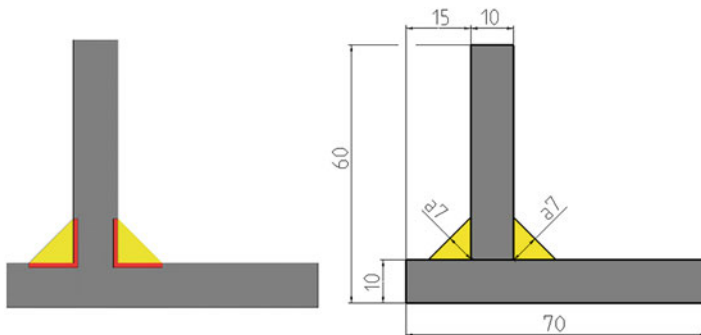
Left: welding joint regions. Right: welding joint dimensions
